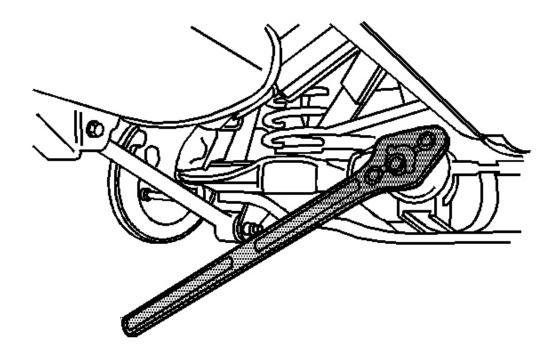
Holding Pinion Yoke With Special Tool Courtesy of GENERAL MOTORS CORP.
